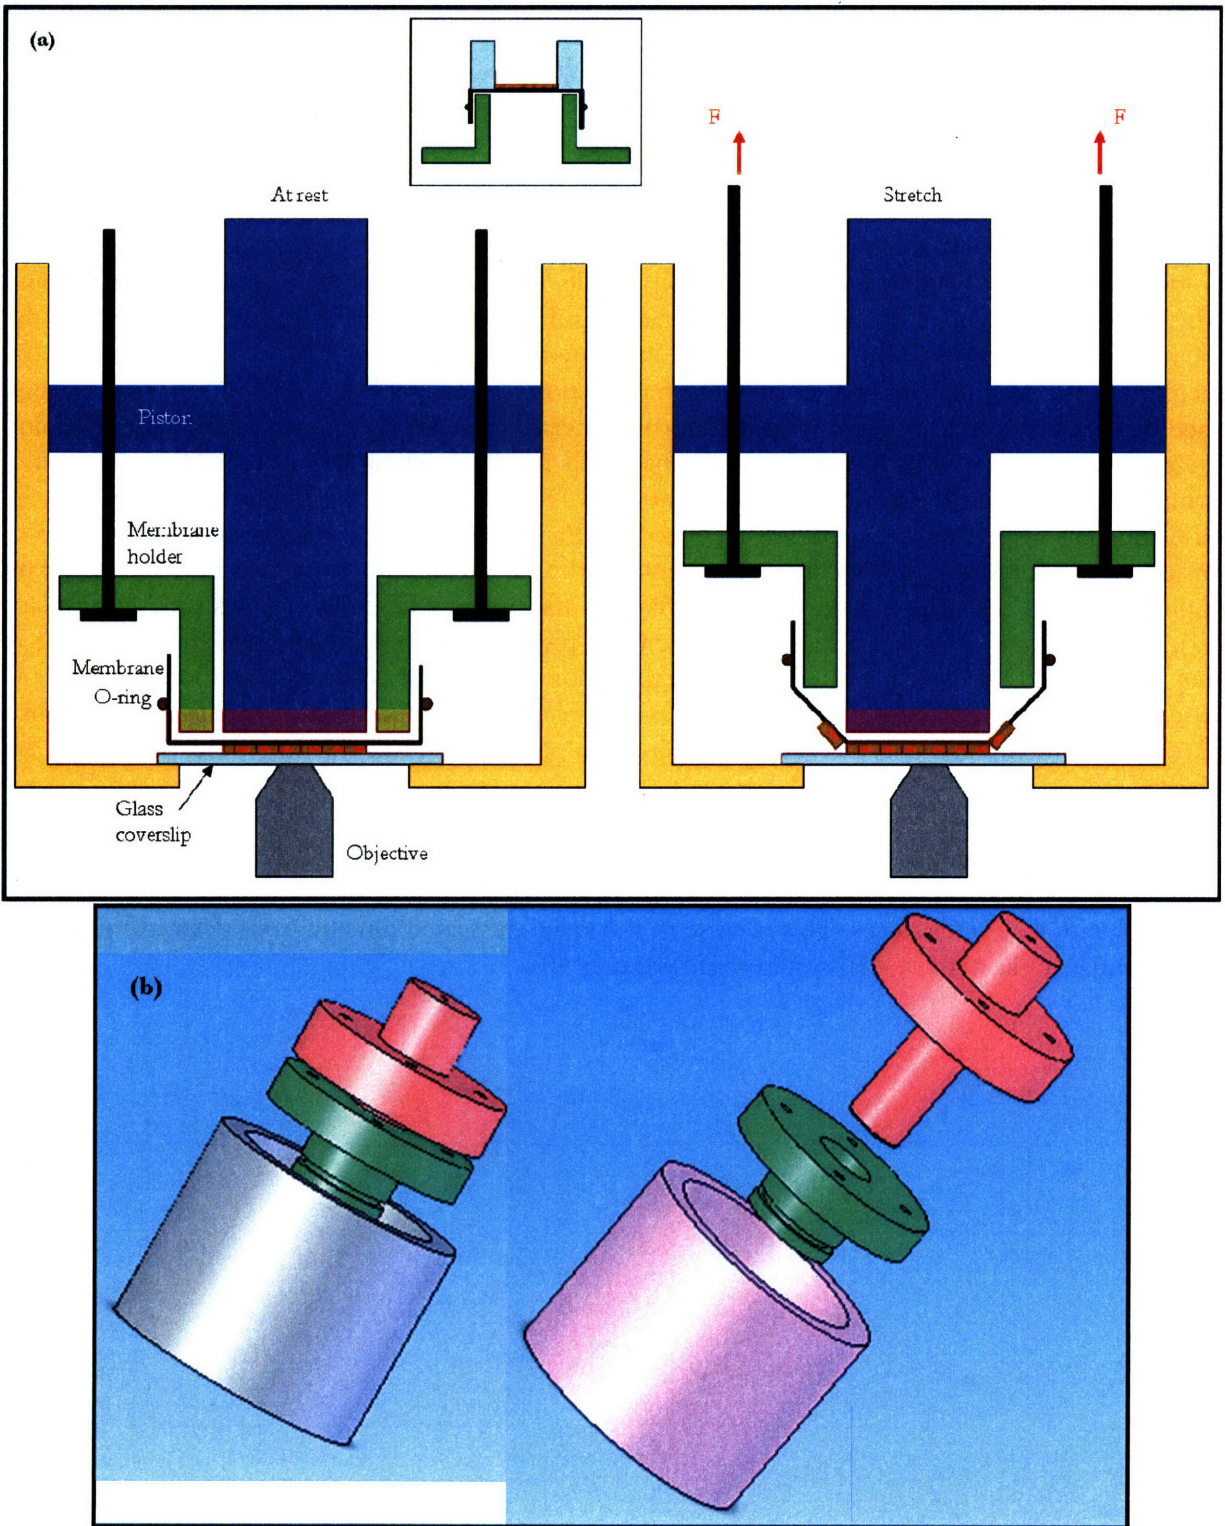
Equibiaxial stretch device. (a) Schematic of the stretch device before and during applied stretch. Membrane holder orientation with cultured cells when in the incubator is shown in the inset. (b) Solidworks drawings of the device in two exploded view configurations, for clearer detail.
